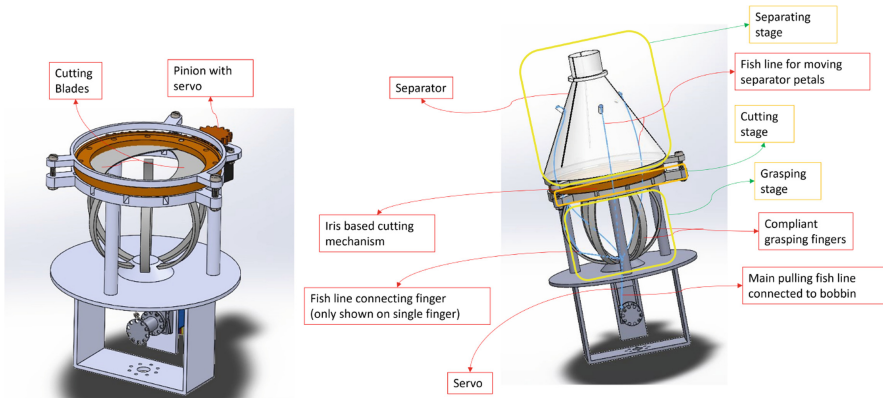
3D CAD model of the mechanical design of the complete gripper assembly built is shown without and with separator
